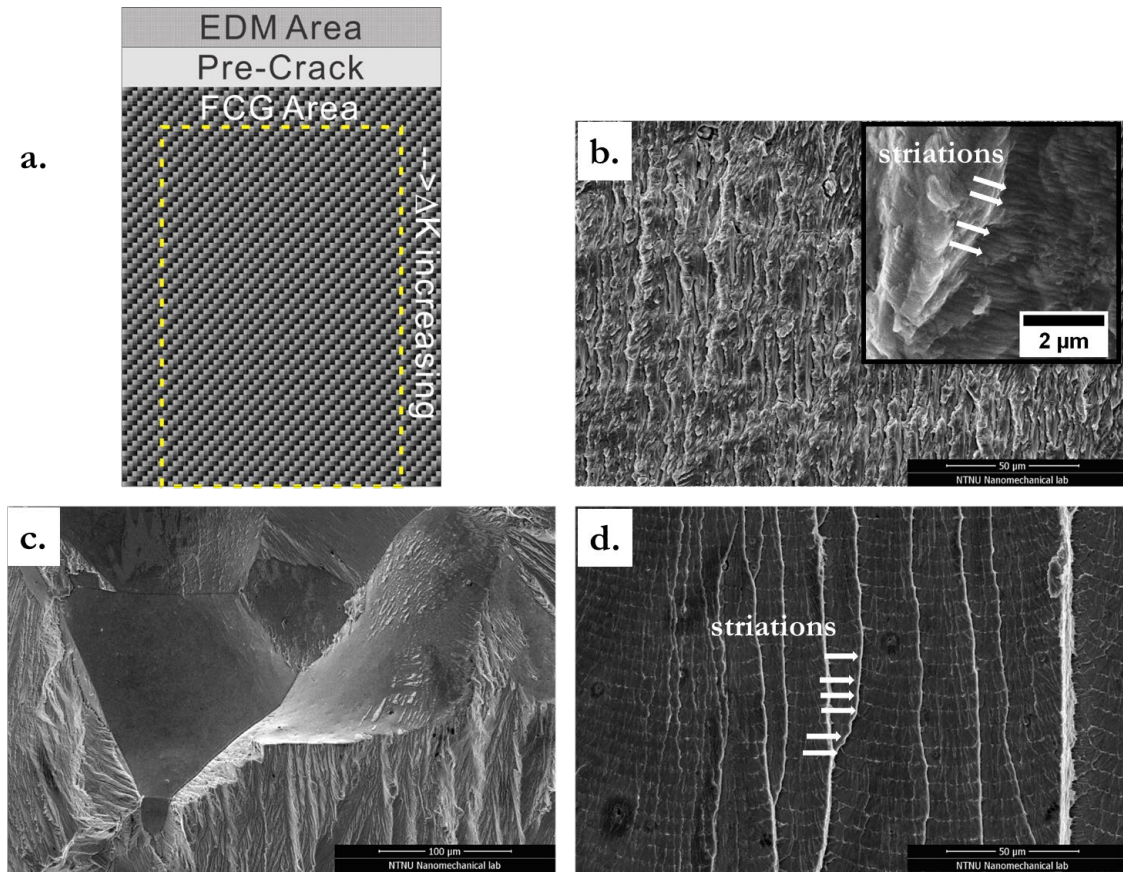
a.* schematic description of the statistical analysis; *b.* typical TG fracture surface with a close-up sub-figure; *c.* typical IG fracture surface; *d.* typical “QC” fracture surface. The striations are highlighted by white arrows.
